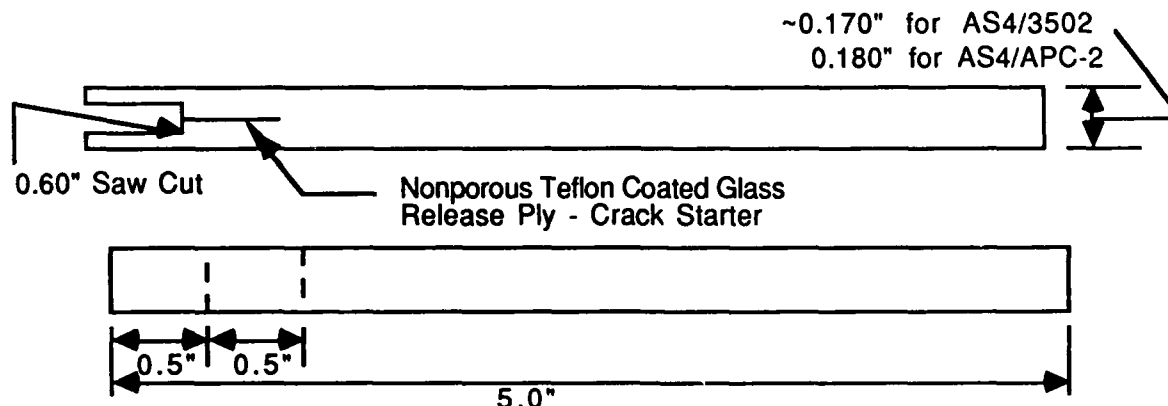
Specimen End Slot Cut (For Modified T-tab Fixtures)
